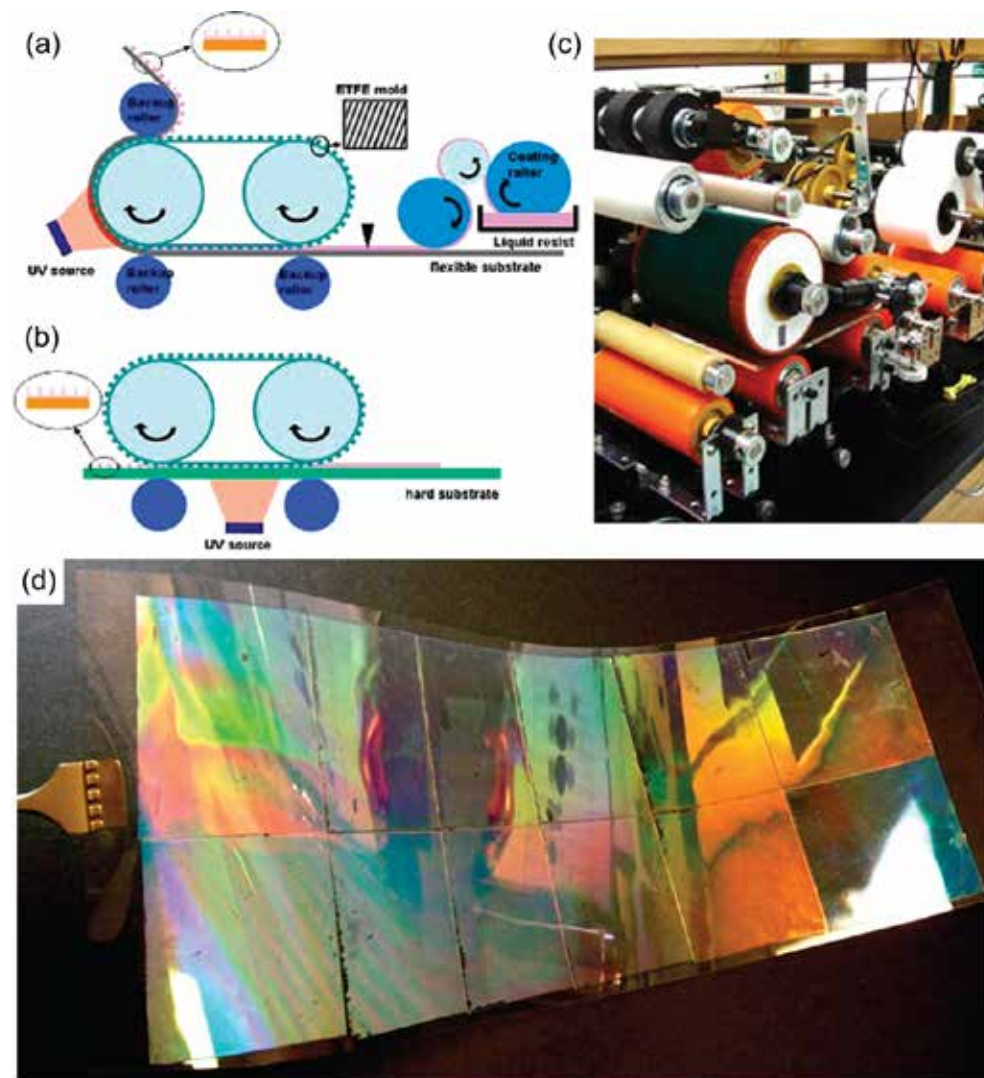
Schematic of UV roll-to-roll and roll-to-plate nanoimprinting setups used by Ahn *et al.* for patterning both flexible substrates utilizing a gravure offset resin coating system and a tensioned ETFE belt mould supported by two rollers.³⁴ b) UV roll-to-plate schematic for rigid substrates. c) Photograph of 6-inch universal UV roll-to-roll and roll-to-plate nanoimprinting apparatus. d) 4-inch wide, 12-inch long, epoxy-silicone grating pattern on flexible PET substrate fabricated by UV roll-to-roll nanoimprinting. This result is a close analogue to a flexible resin mould. The grating dimensions are 300 nm linewidth, 600 nm height and 700 nm pitch. Reprinted with permission. Copyright 2009, American Chemical Society.
